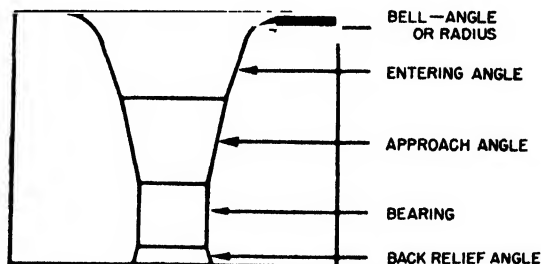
9. Enlarged cross-section of die hole showing names of parts.
